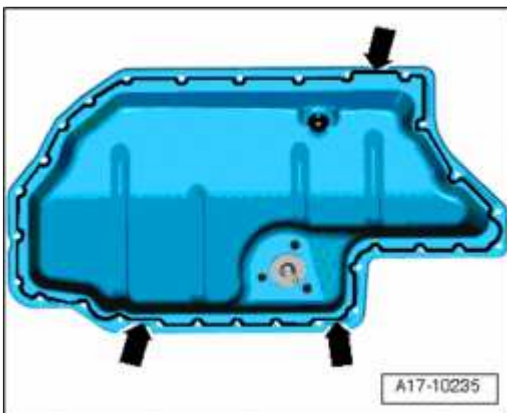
Applying Sealant Bead On Clean Sealing Surface Of Lower Part Of Oil Pan
